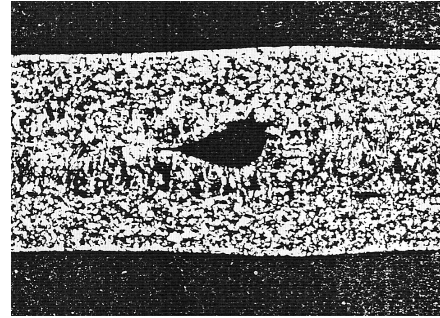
Example of a rather large shrinkage cavity at the weld centre.
